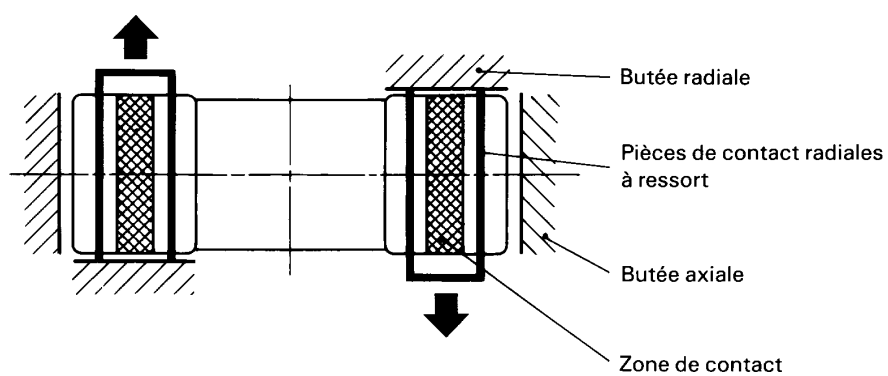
(III) – Fuse-links with cylindrical contact caps with striker
